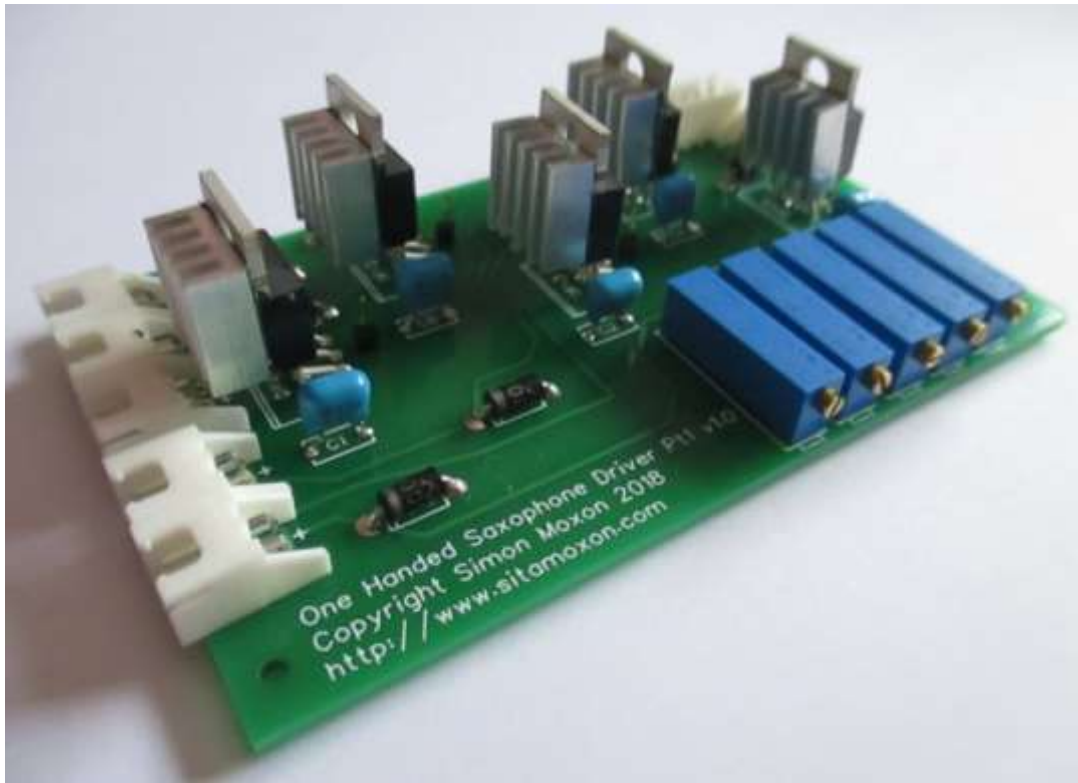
Components soldered onto manufactured PCB Version 1.0
